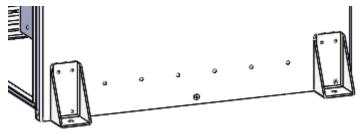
EXTERIOR PAD MOUNTING FEET FOR ENCLOSURE
